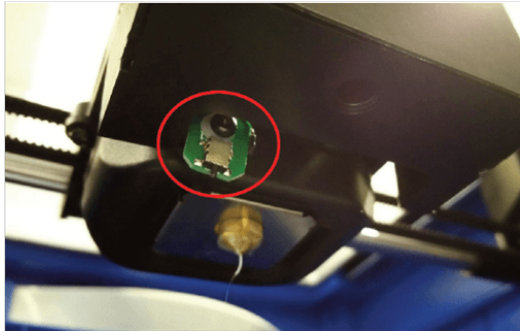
Rotate the levelling arm to vertical position before removing the servo motor assembly.
